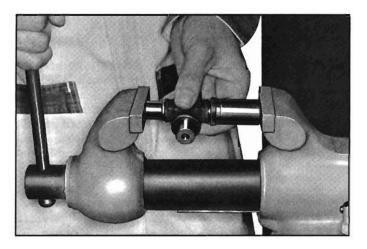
C-8-"U" Joint Trunnion Seal Installation
